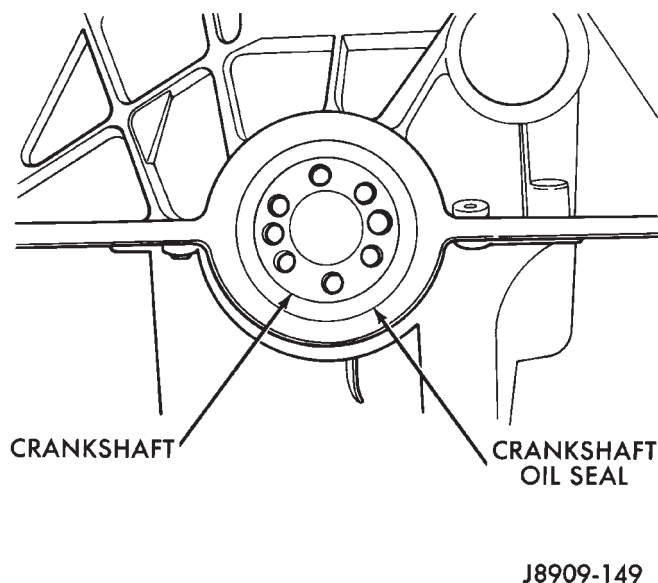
Replacement of Rear Crankshaft Oil Seal
